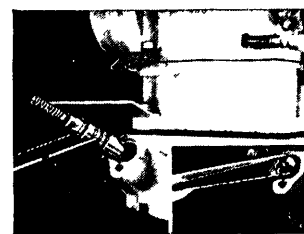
If equipped with starter switch, install strainer and retainer ring. Then install switch ball, plunger, guide block, contact spring and return spring
